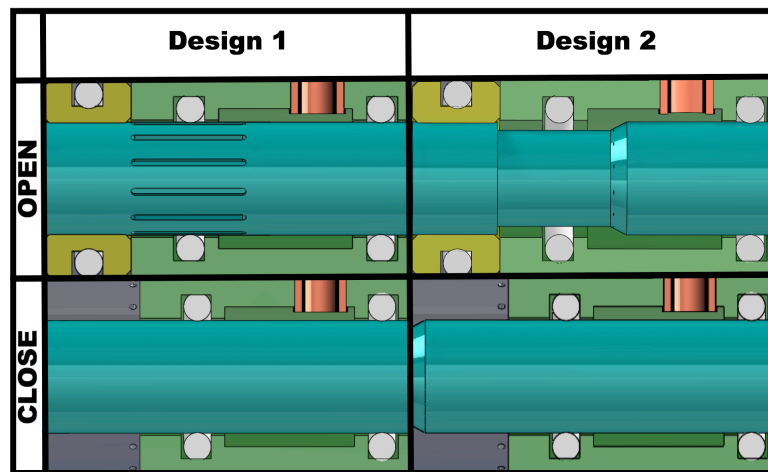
Detail of the inlet valves. On the left, the flow valve opens thanks to a 0.35 mm groove manufactured of the pistons shaft. On the right, a groove with a 30° chamfer allows the gas passage. Both valves close when the piston rod touches the O-ring homogeneously.
